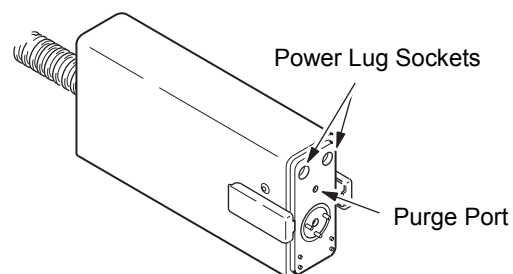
Cleaning the Power Lug Sockets and the Purge Port
